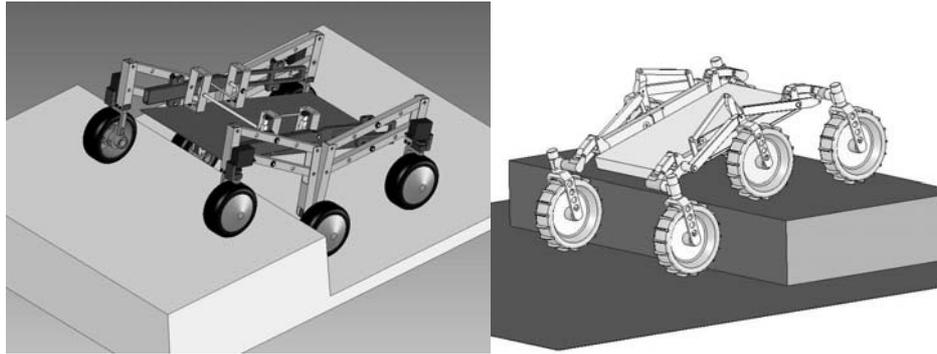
(left) CRAB chassis, (right) Exomander (RCL-D) Chassis
